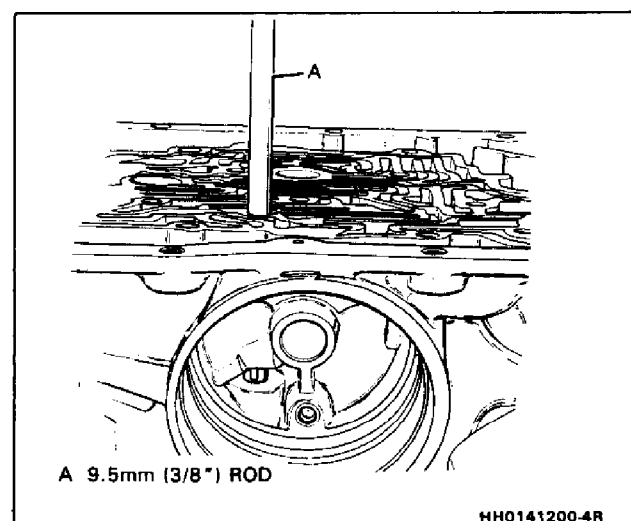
Installing Third Accumulator Retainer and Ball Assembly
